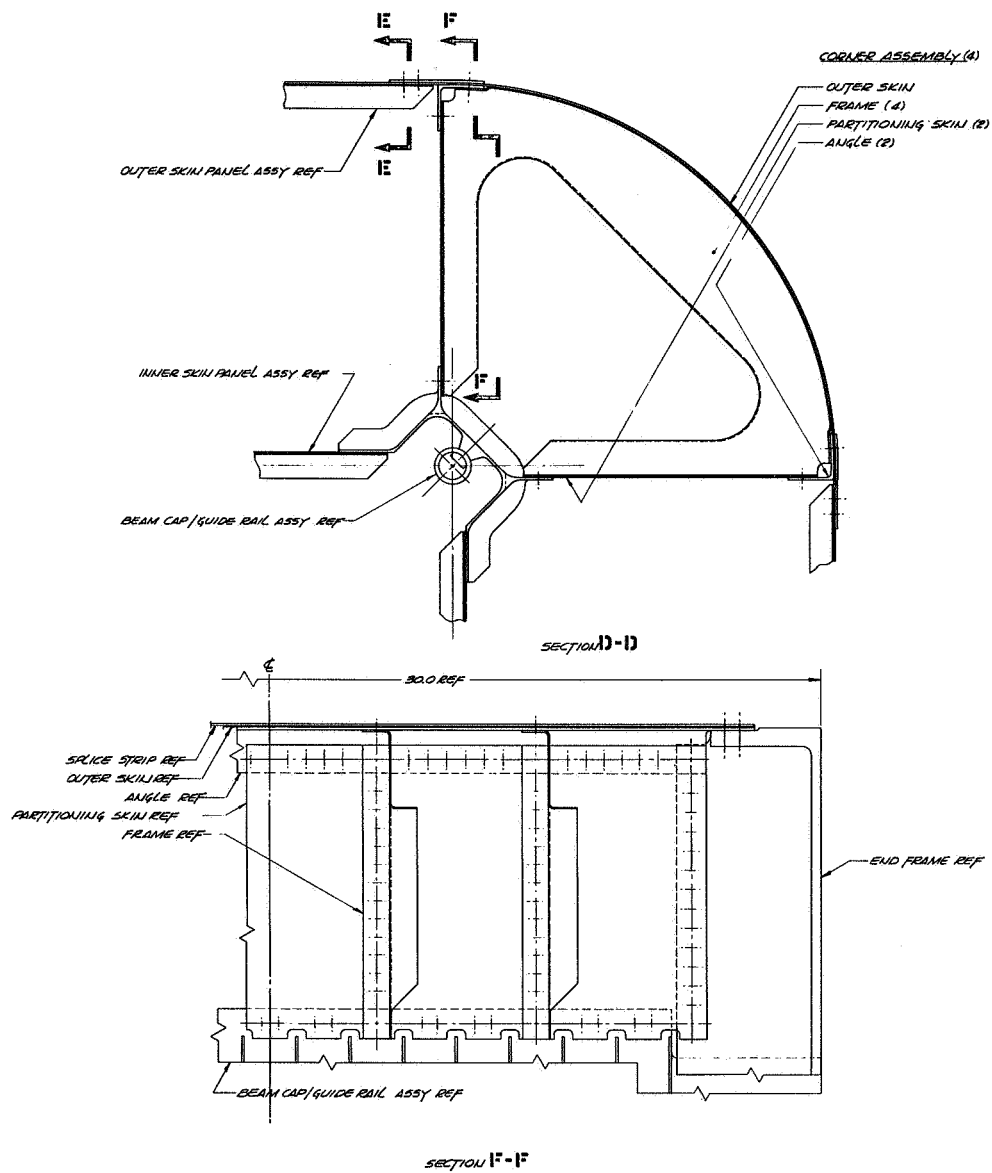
Main Rotational Frame and Arm/Counterweight Drive Frame Structural Assembly.
